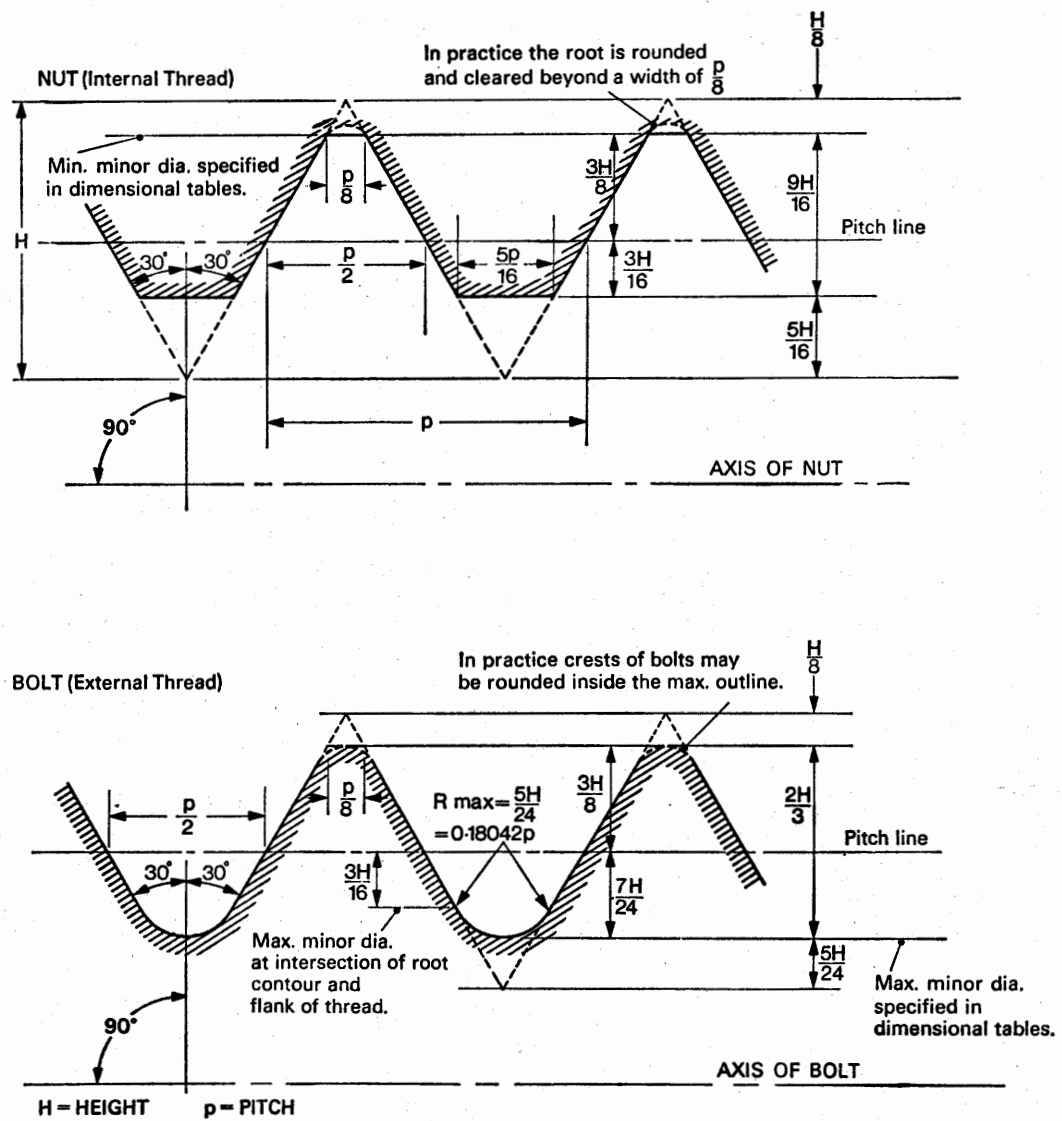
DESIGN FORMS OF UNJ THREAD (MAXIMUM METAL CONDITION)
